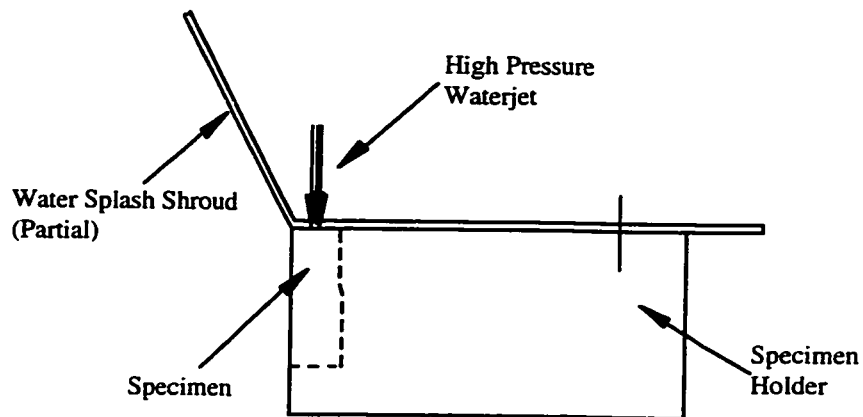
Specimen Holder and Splash Shroud Assembly
